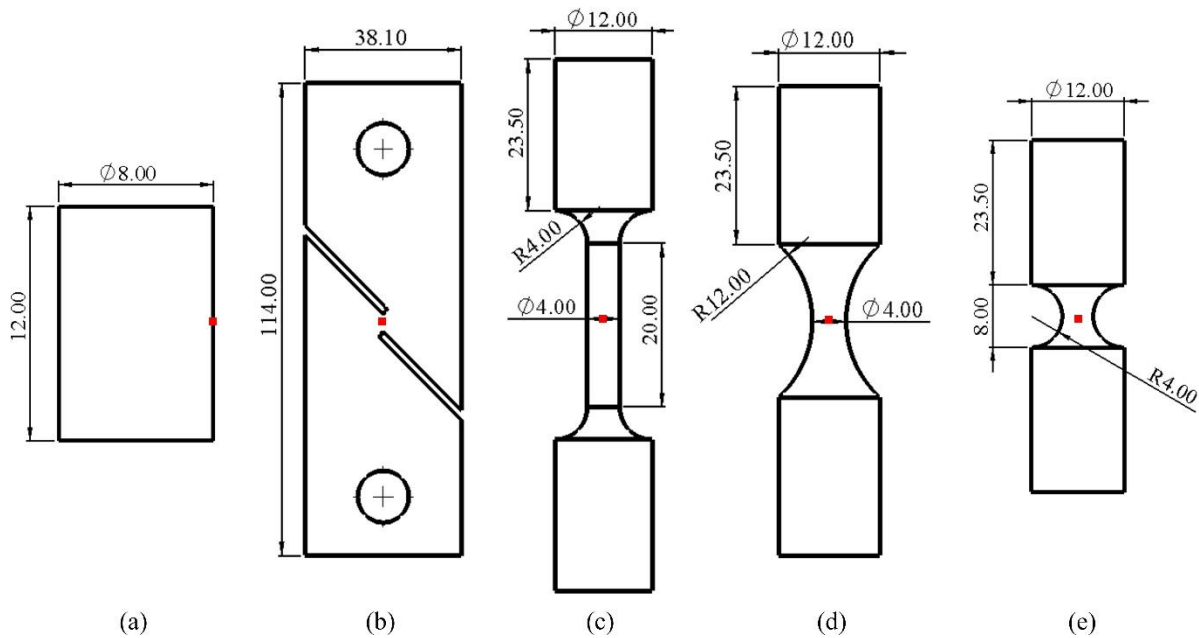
Dimensions of coupons and the positions used to calculate the triaxiality factors: (a) uniaxial compression (D/H=0.67); (b) shear; (c) uniaxial tensile (non-notched); (d) tensile (large notch); (e) uniaxial tensile (small notch). Note: all dimensions are in mm, and they are not to scale.
